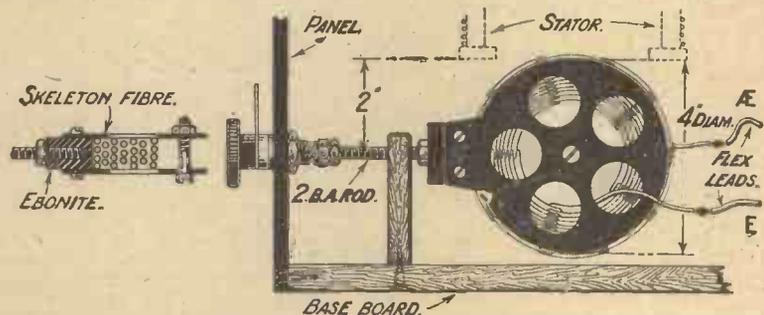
Constructional details of the rotor, which consists of a double basket coil of 25 turns of No. 14 d.c.c. wound upon a former 2 inches in diameter. The spokes are removed after winding.
